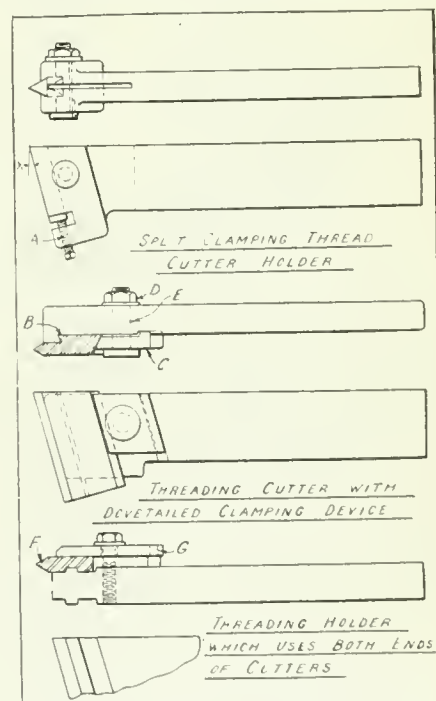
GROUP OF CUTTERS AND HOLDERS USED FOR THREADING.
